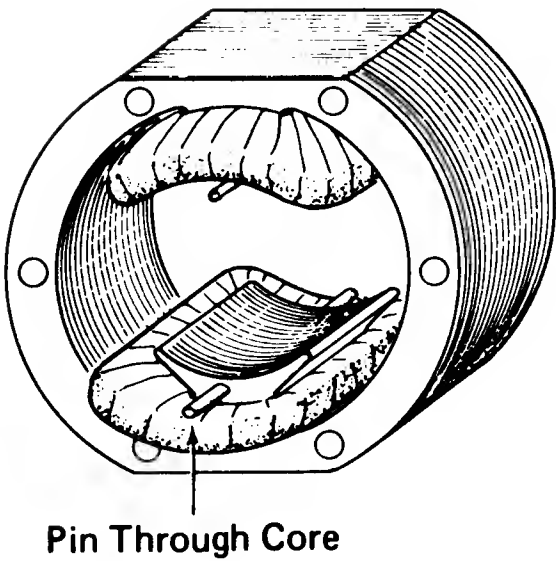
Parts of a universal motor. (*The Dumore Co.*)
